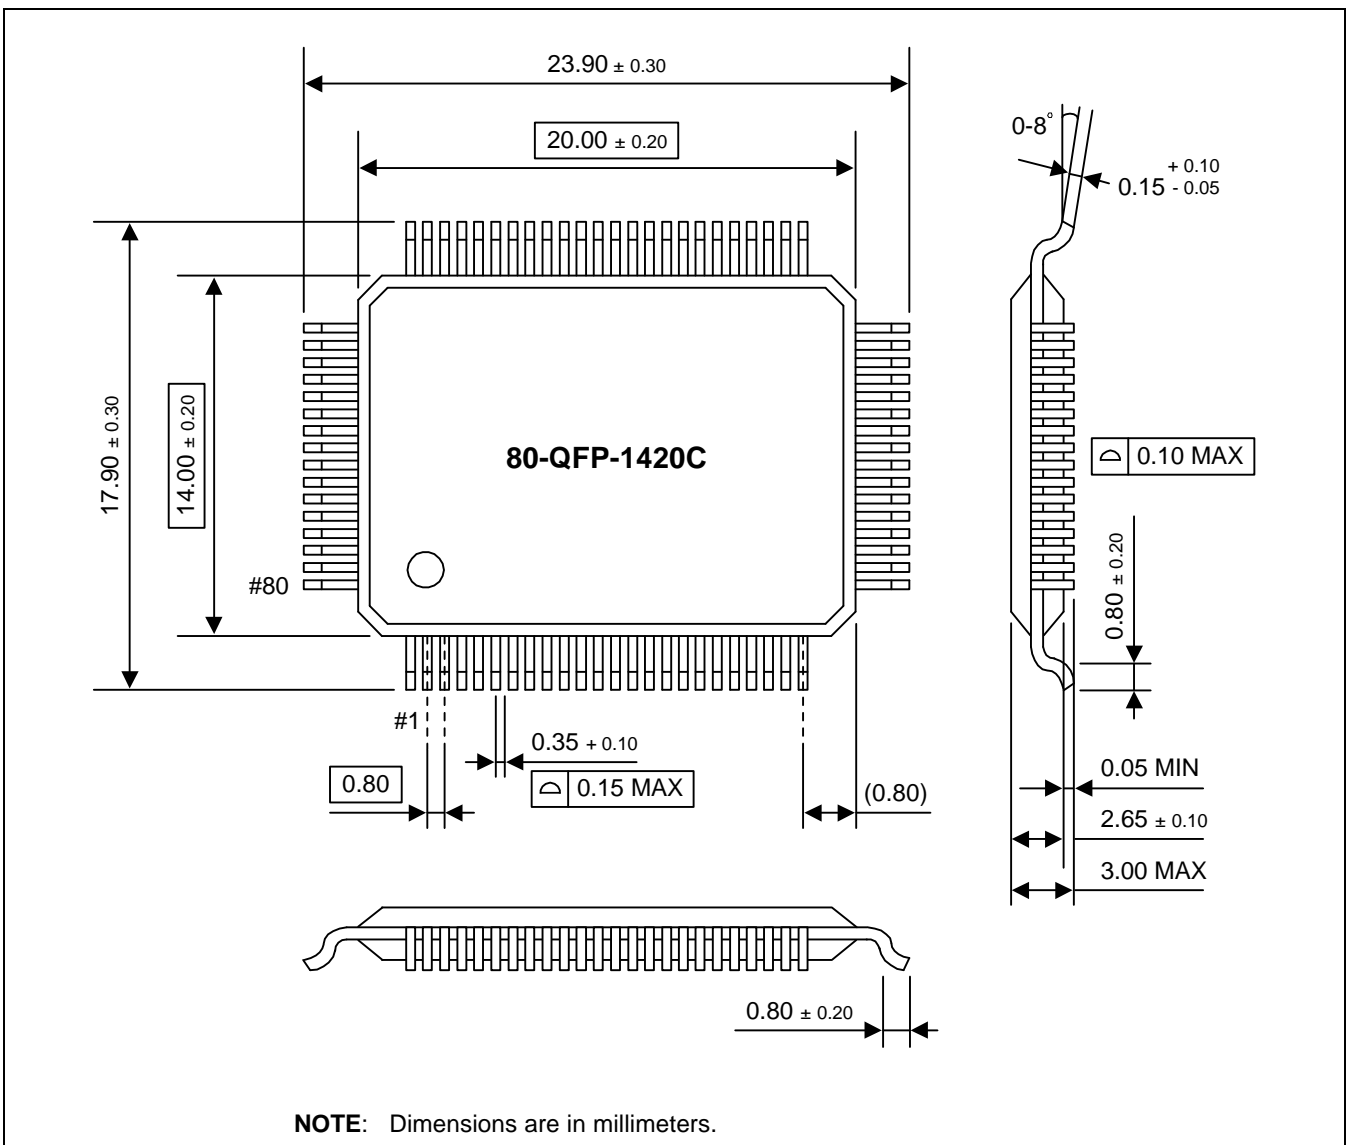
80-Pin QFP Package Dimensions (80-QFP-1420C)
